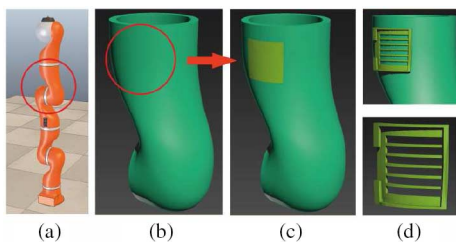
Skin support: a) the KUKA LWR4 3D arm model, b) selected surface, c) extruded shape d) designed skin support.
